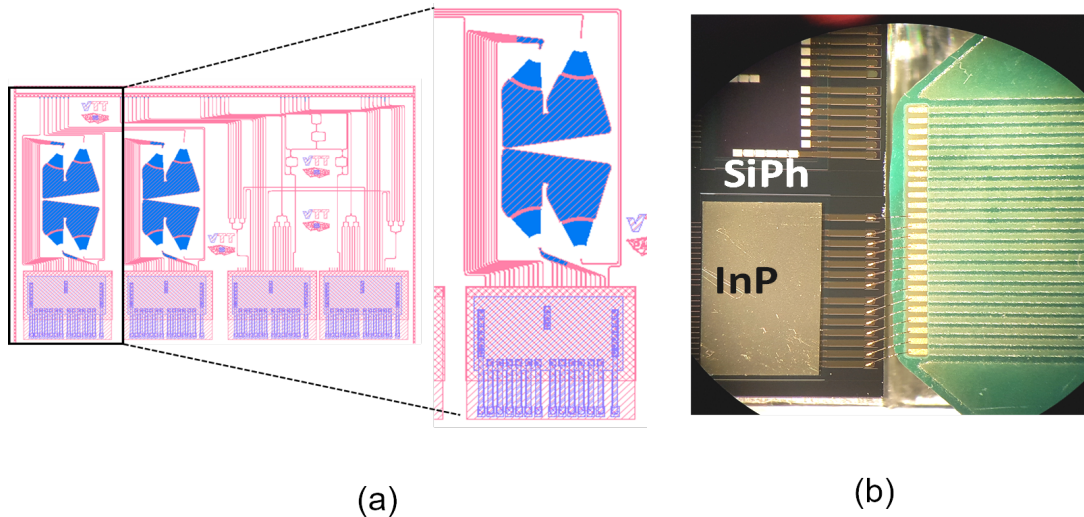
Assembled chip R3C3 (a) mask layout of SiPh chip with cavity (b) R3C3 F/C bonded in position
